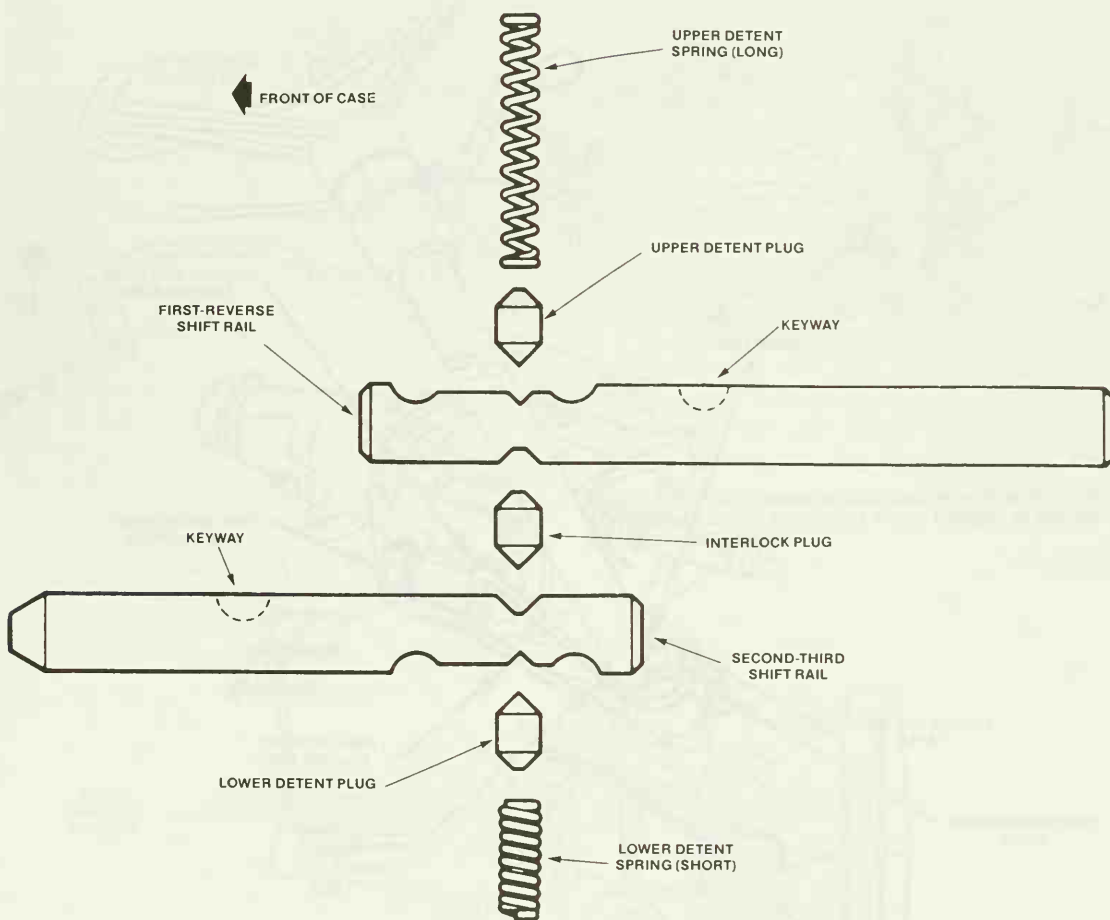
The shift rails and detent plugs prevent two gears from meshing at one time. (American Motors Corporation)
